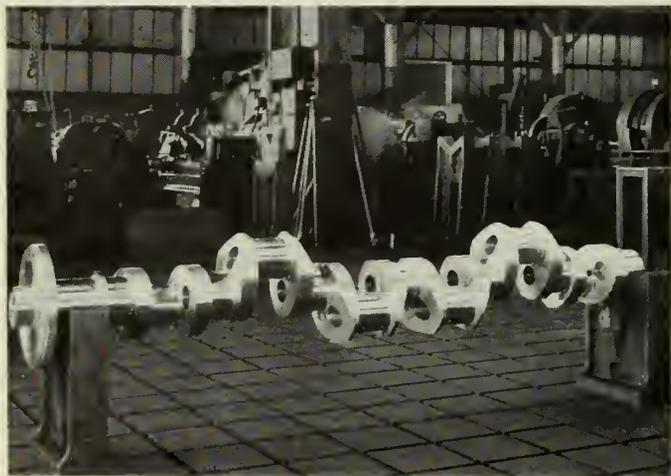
No. 2 Light Weight High Speed Diesel Engine Crankshafts Chrome Nickel Molybdenum Steel, quenched and drawn to test 115-95-20 and 50.
